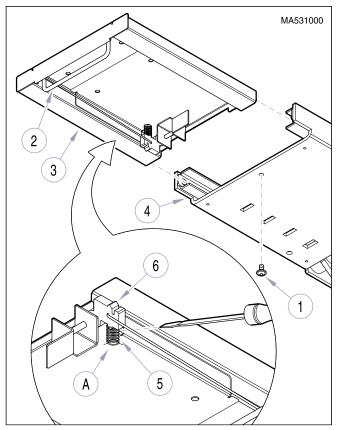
Foot Rest Latch Spring Removal / Installation
